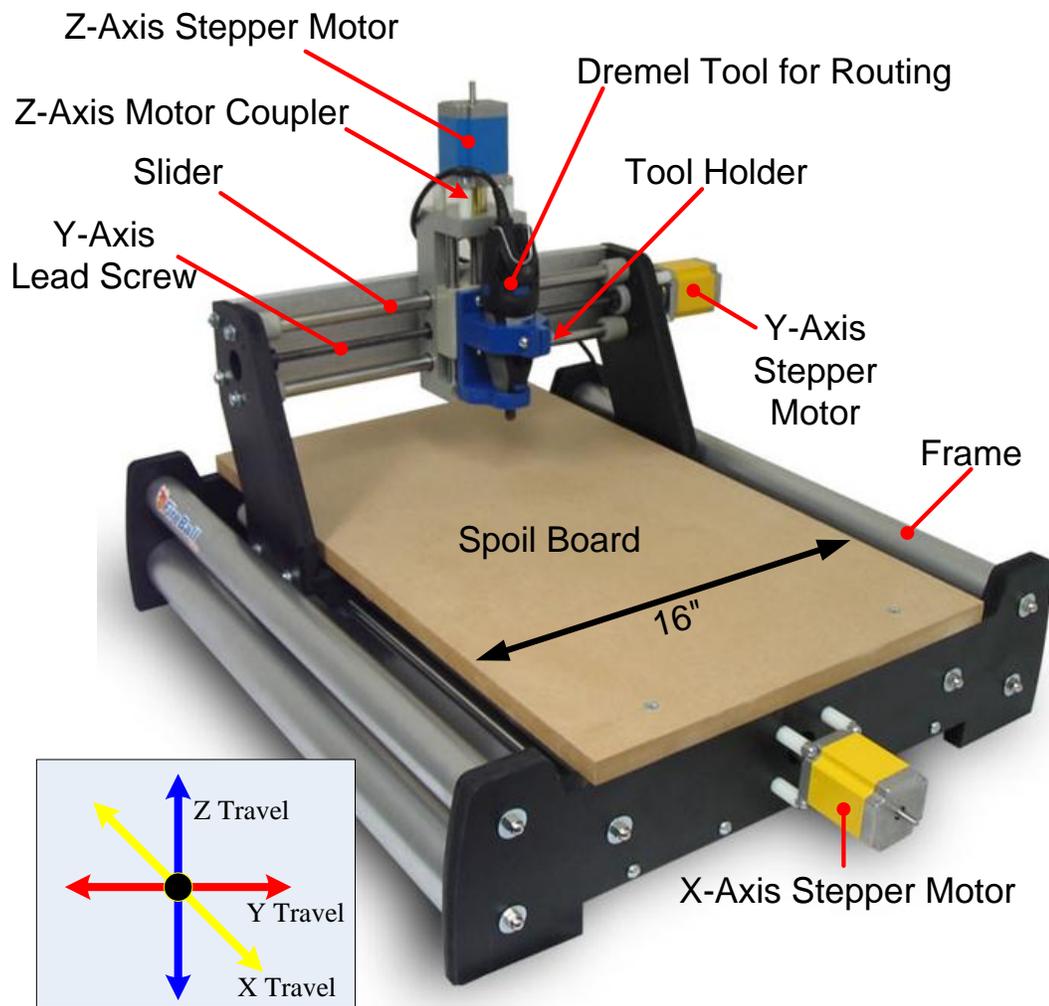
The Fireball V90 XYZ platform shown holding a dremel tool. Image courtesy of Probotix.
